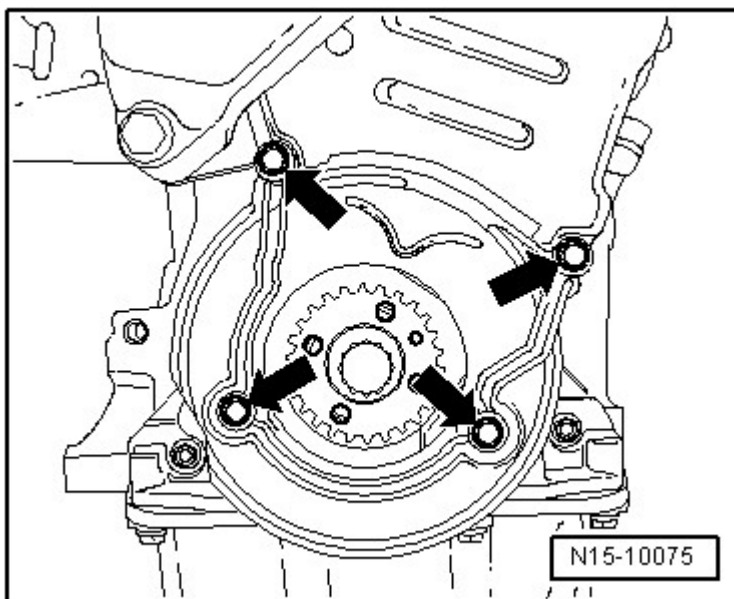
Identifying Bolts From Lower Section Of Toothed Belt Guard
